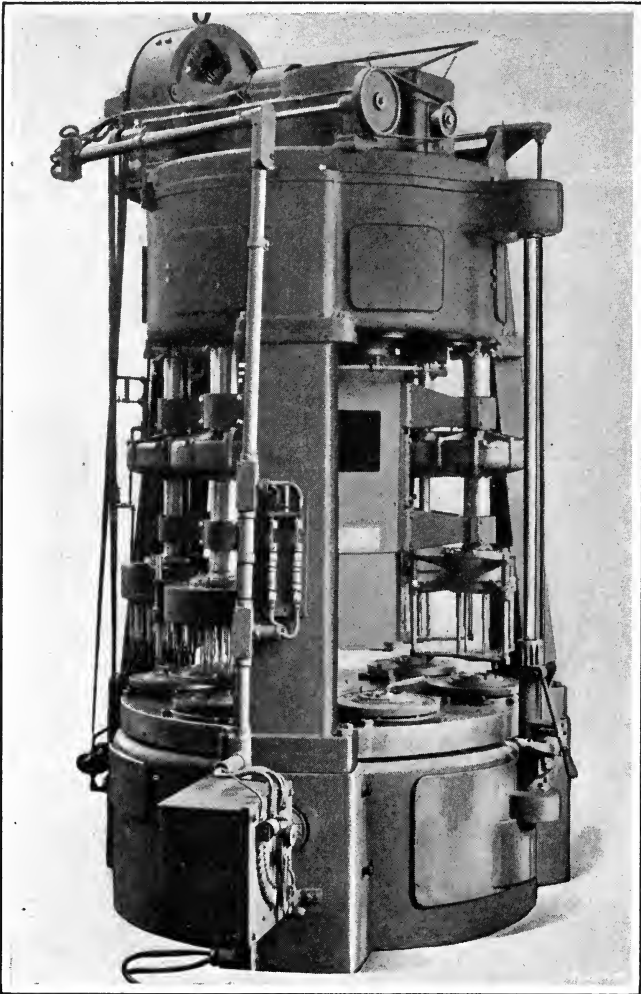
Station-type Multiple-spindle Drilling Machine built for Performing Eighty-one Drilling, Counterboring, and Reaming Operations on Ford Flywheels
